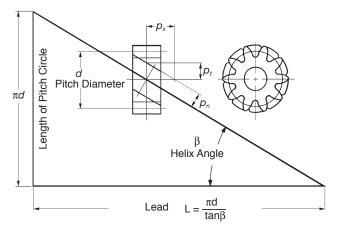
Fundamental Relationship of a Helical Gear (Right-Hand)
